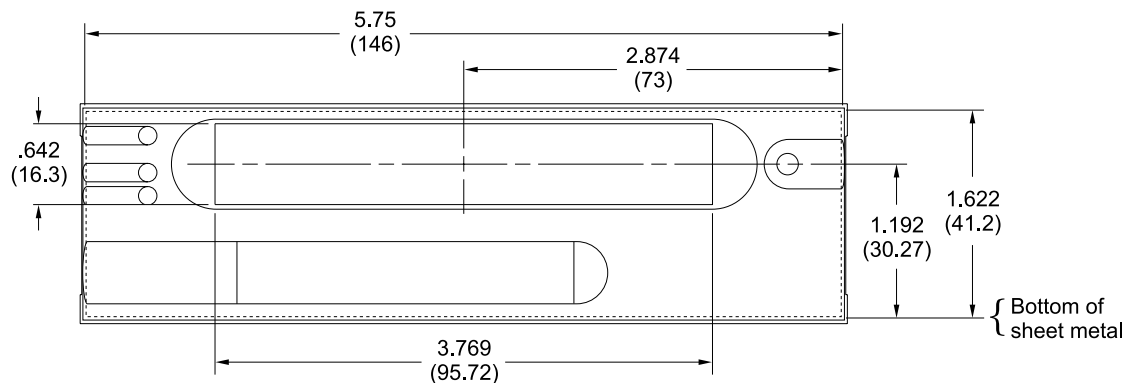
Dimensional location of the cartridge insertion opening in inches and millimeters
